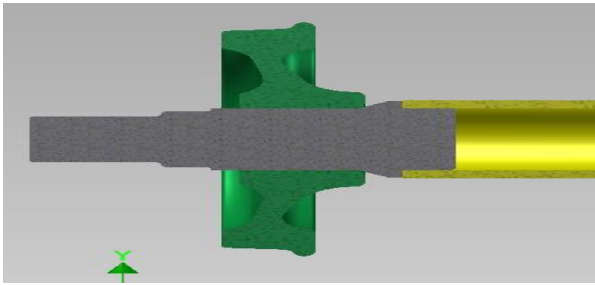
Modified Hollow Axle and Wheel & Shaft Assembly
